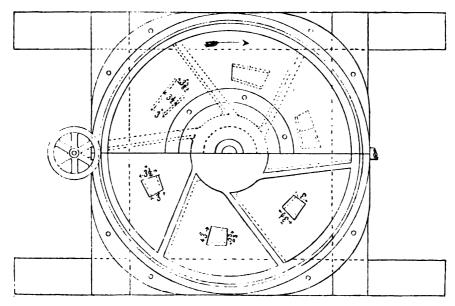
Plan of Grinding Pan, Muller Frame removed in lower half.
